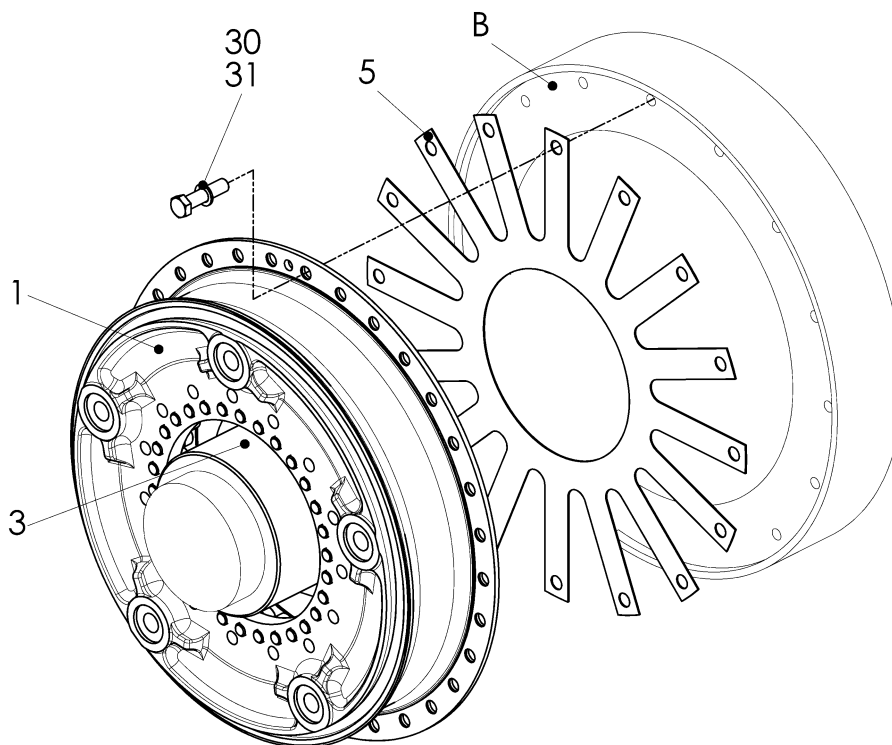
Mounting the link flange assembly with/without sheet (5)
